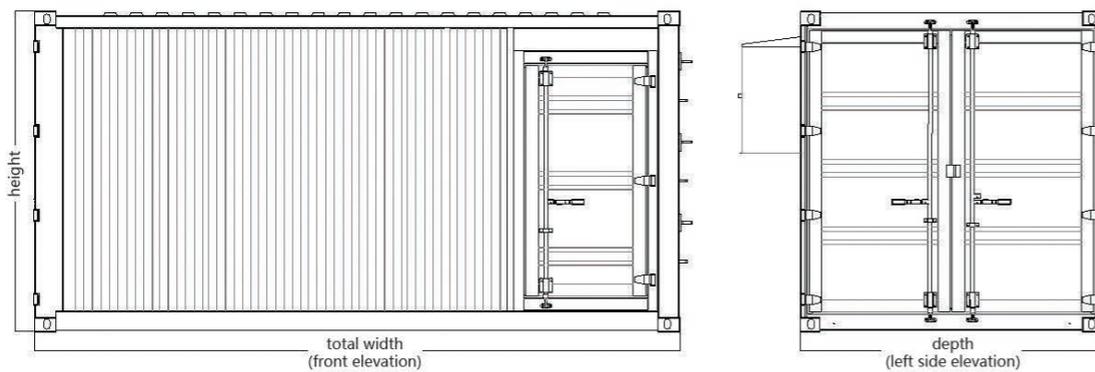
Dimensional Drawing of G31-6kV-Outdoor-Air Cooling FGSVG-C6.0/6-O
